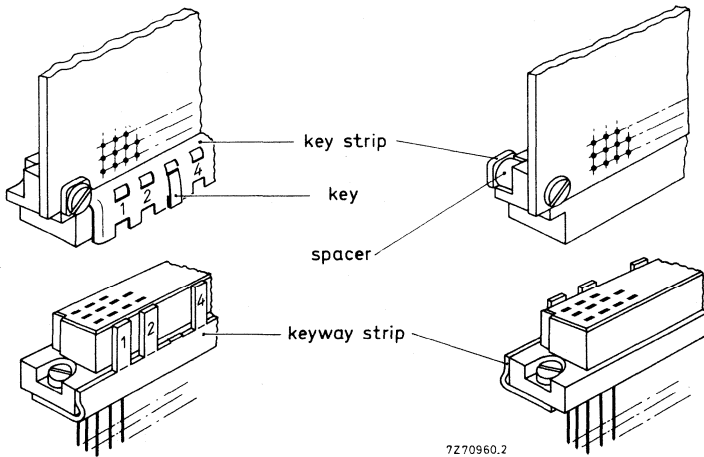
Coding parts; key strip mounted to solder side of printed board.
